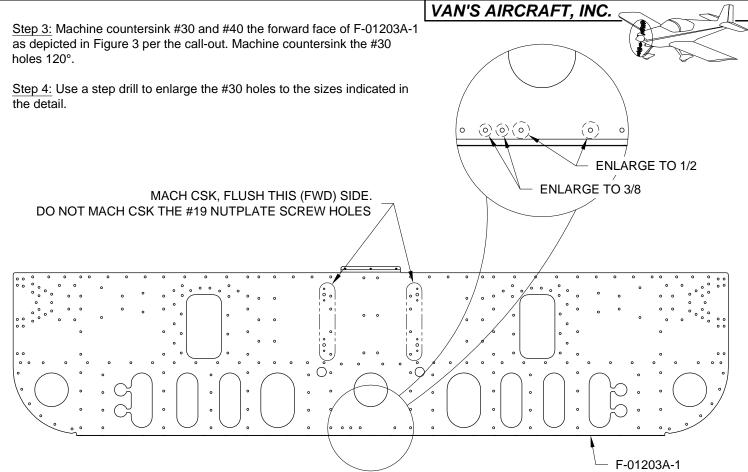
PREPARING F-01203A-1 (FRONT VIEW; BOTTOM FLANGE BENT BACK INTO PAGE)
